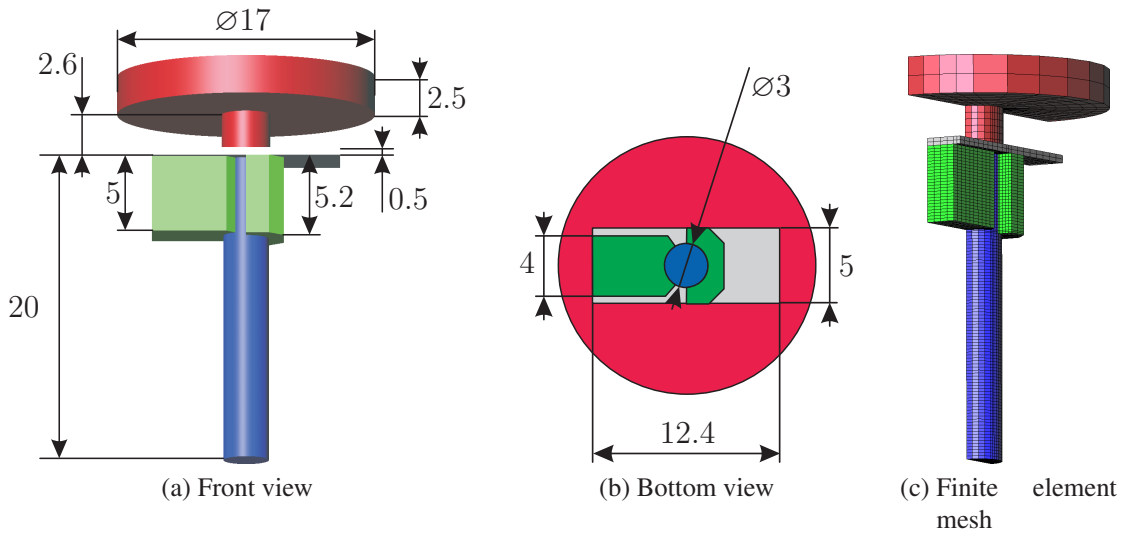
Model of cooling experiment (dimensions in cm), the heat flux q is specified throughout the surface
